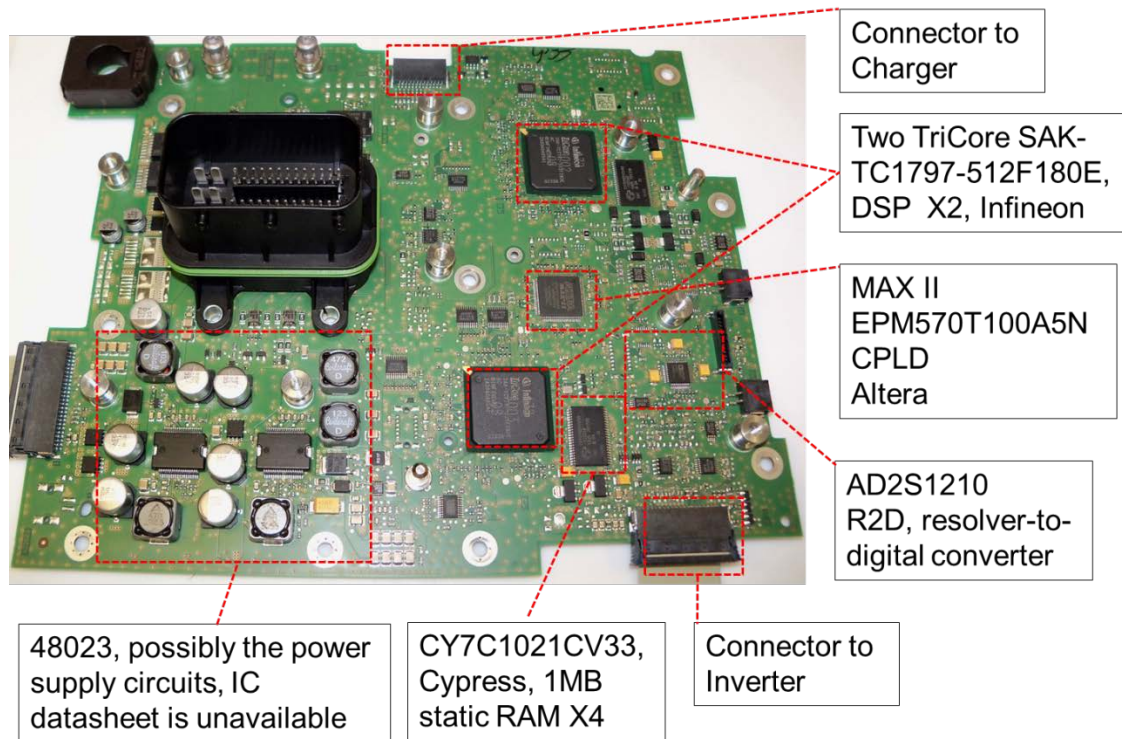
Key components on control board in 2016 BMW i3 inverter assembly.
